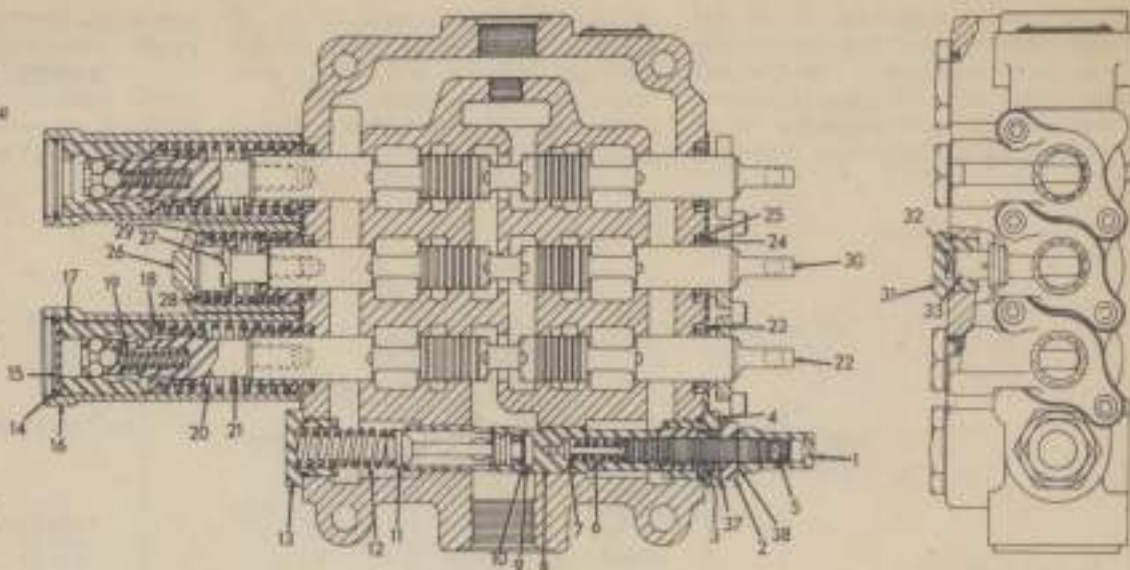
Cross sectional view of three spool control valve for use with high volume (25GPM) pump available on D-15 tractors.
